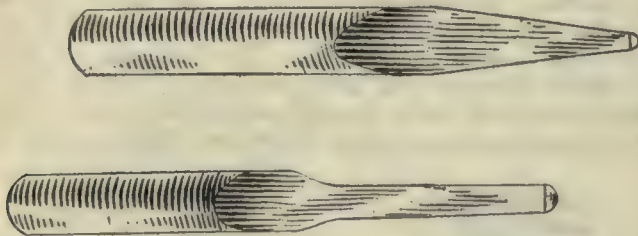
TOOLS FOR FORMING IMPRESSION IN SWAGING DIES
